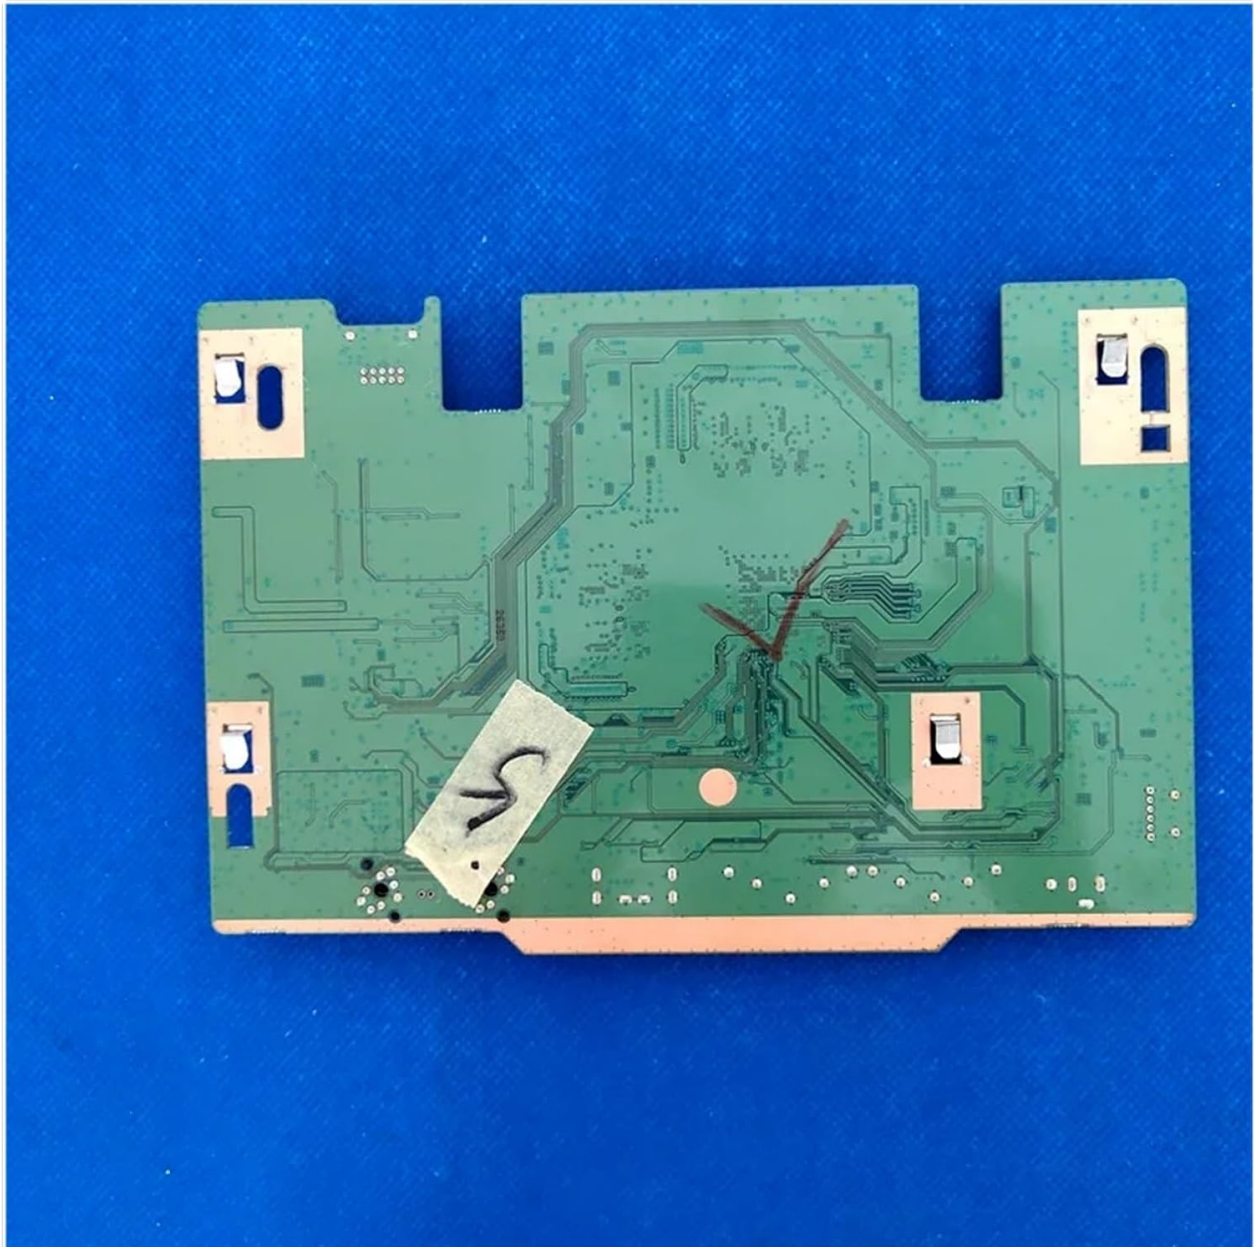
Underside view of the main board, illustrating the solder points and circuit traces. This side should be protected from physical damage and moisture.
